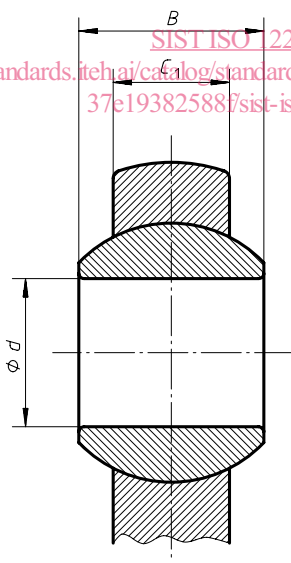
Spherical plain bearing rod end with mounted spherical plain radial bearing (cartridge design)
